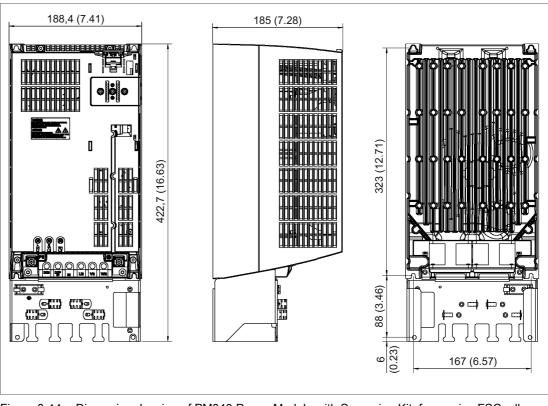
Dimension drawing of PM340 Power Module with Screening Kit, frame size FSC, all dimensions in mm and (inches)
